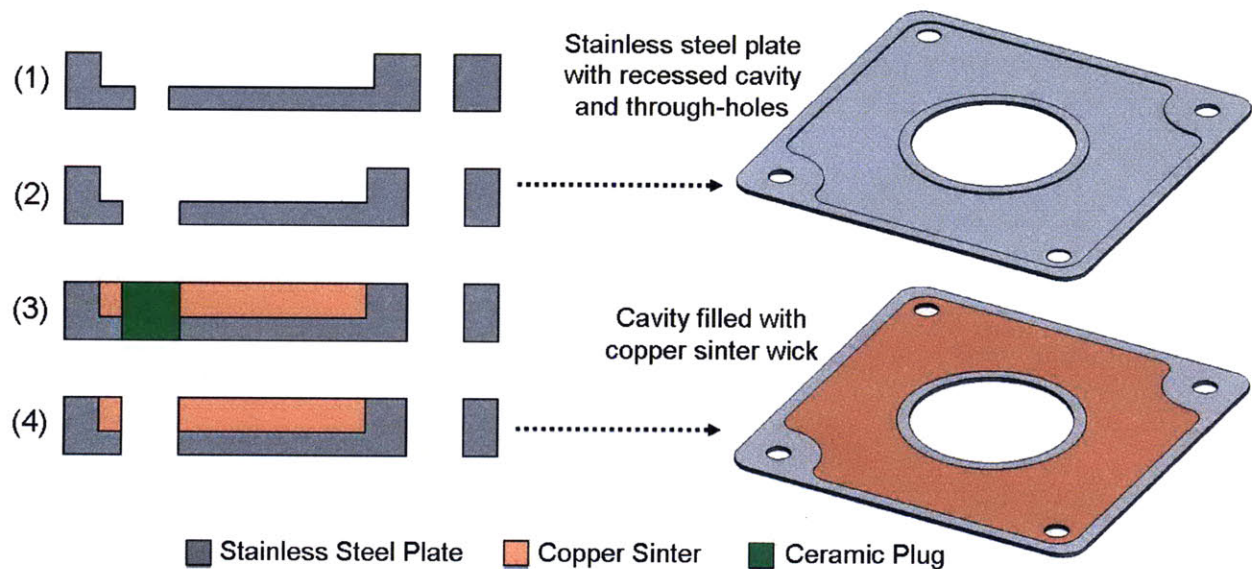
Schematic of MEMS fabrication process to produce sinter-coated condenser plates including 3D images of steel plates after chemical etching and sintering.
